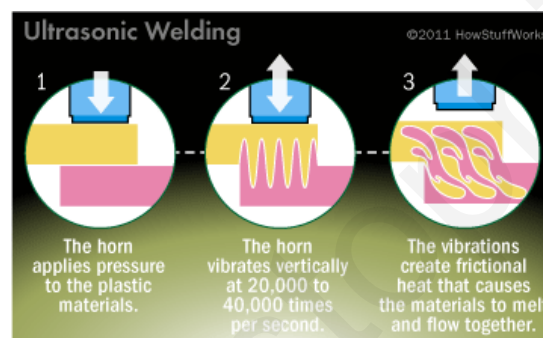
Diagram of ultrasonic welding of polymer foils [85]
